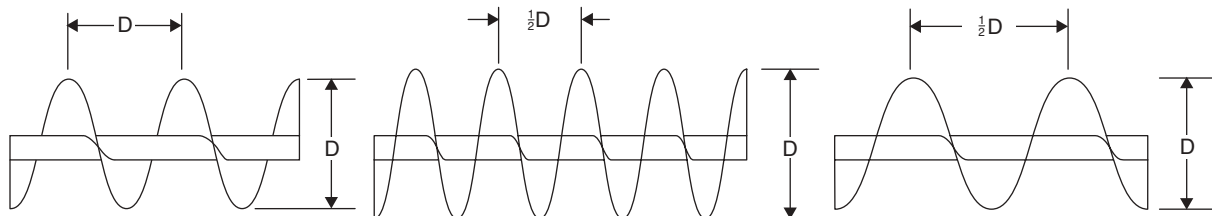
Common screw pitches, given in terms relative to the diameter. (From the KWS, *Design, Engineering, Manufacturing Screw Conveyor Engineering Guide*.)
